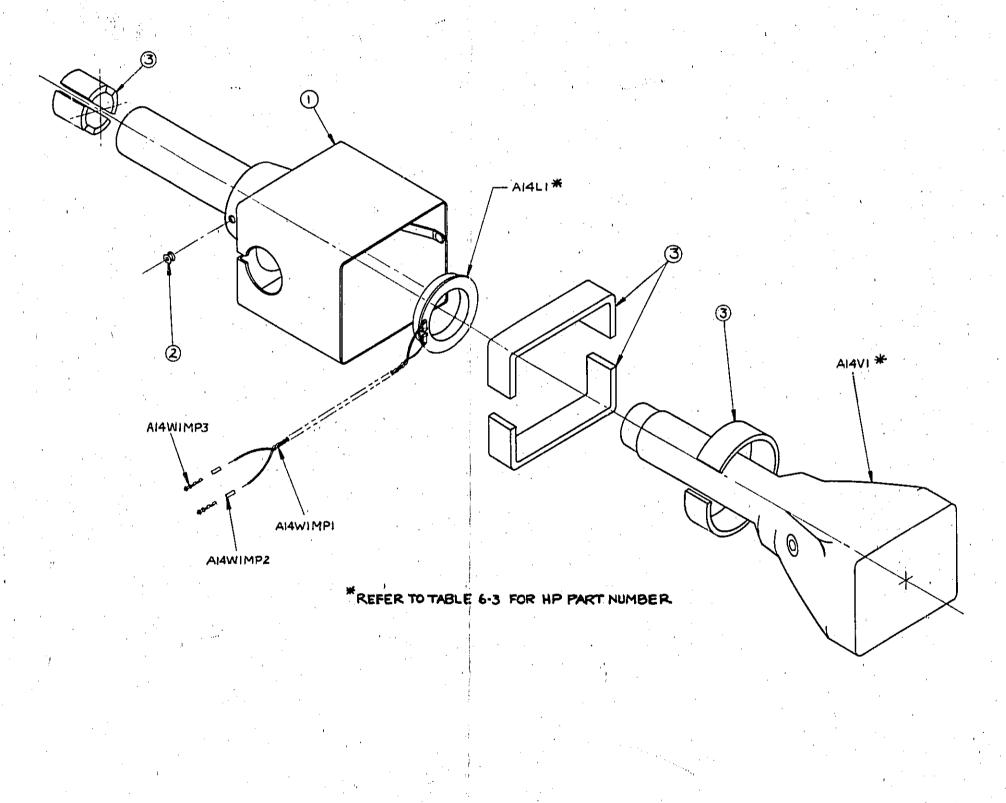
CRT Assembly, Parts Locations 6-33/6-34
